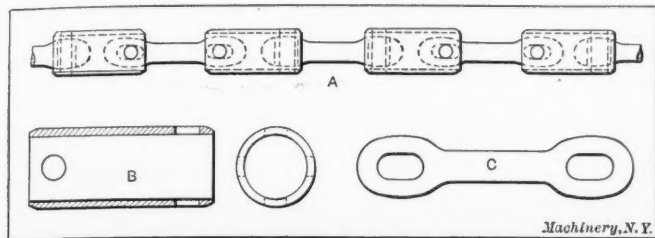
A Simple Construction of Flexible Shaft—Upper View is Full Size, Lower Views are Twice Actual Size
